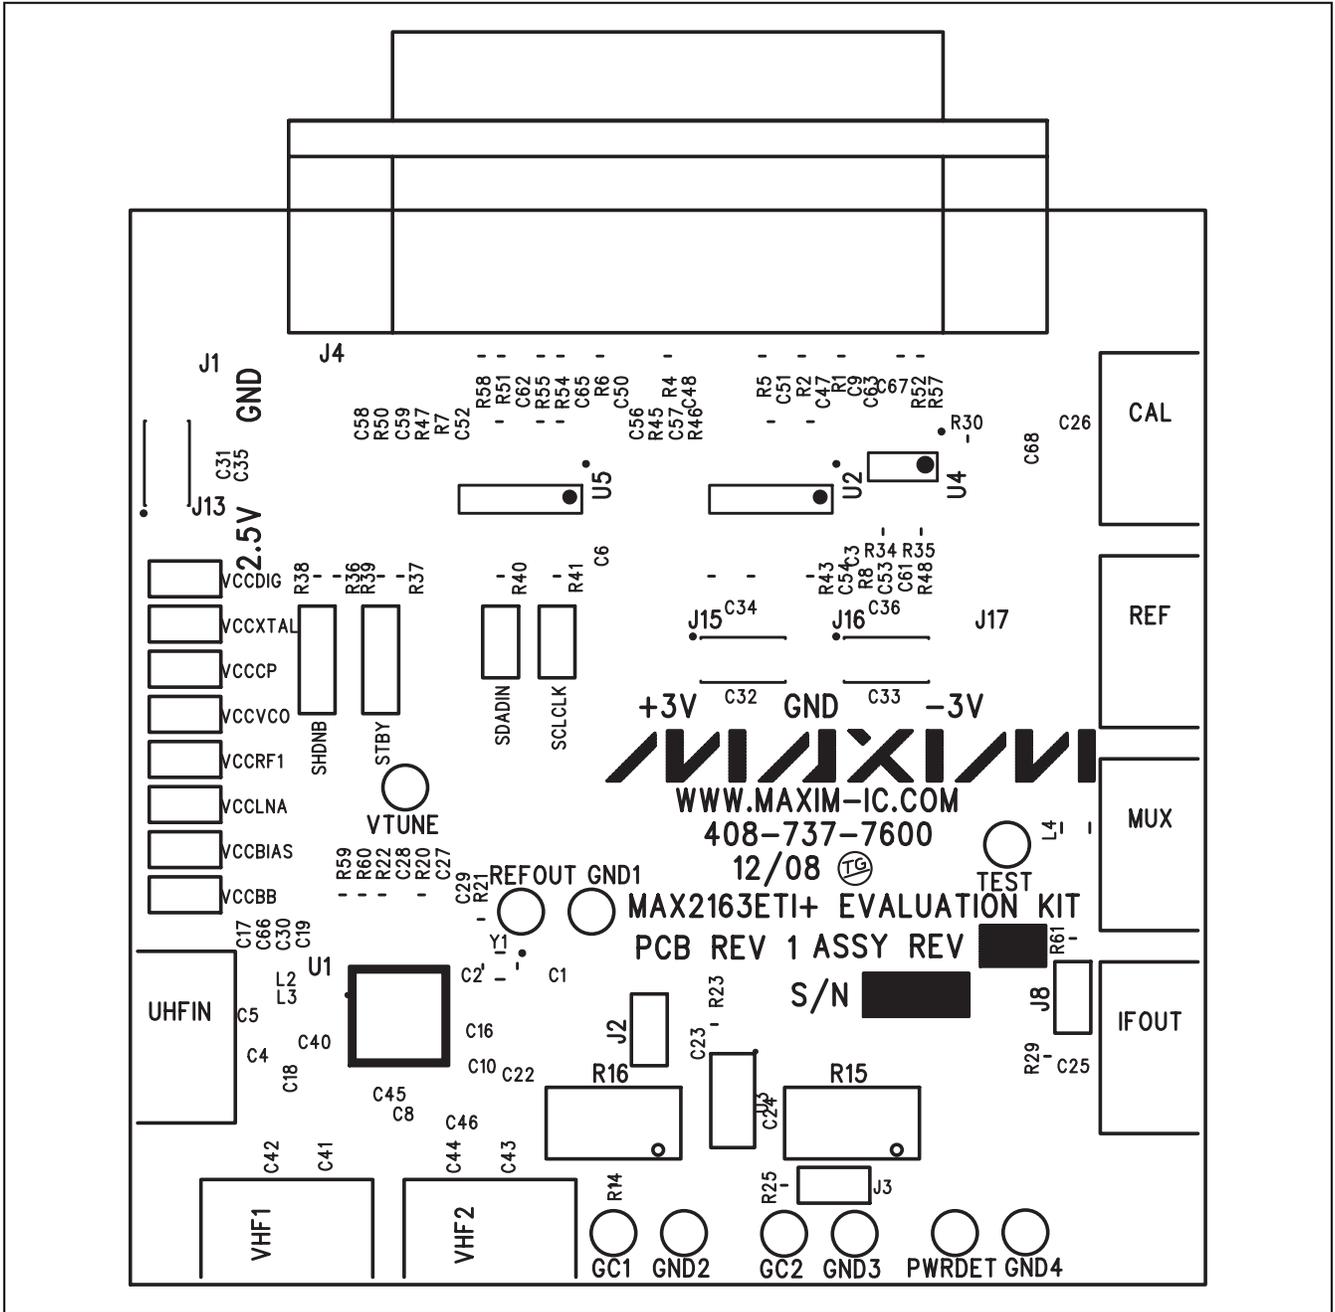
MAX2163 TQFN EV Kit PCB Layout—Top Silkscreen
